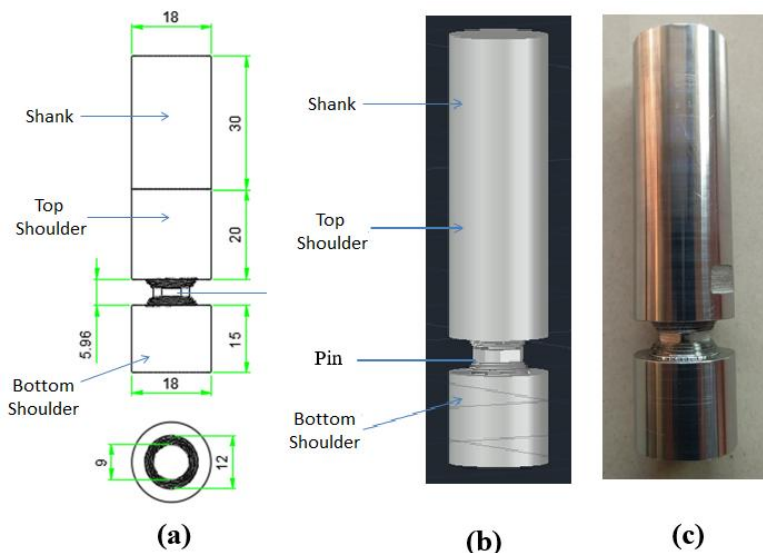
Tool-1, (a) 2D sketch, (b) 3D rendering, (c) actual
